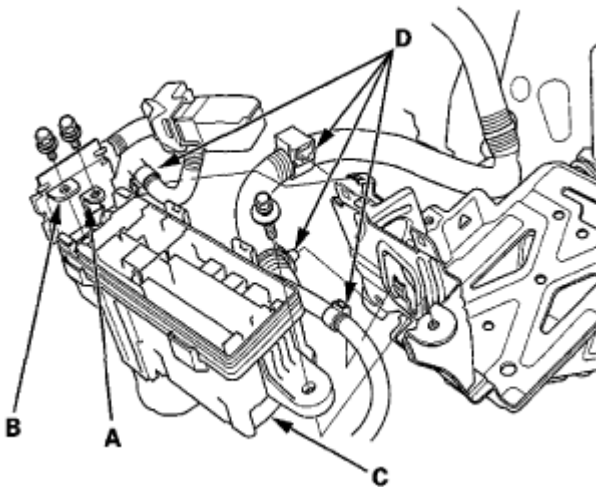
Identifying Engine Wire Harness, Starter Cable Of Main Under-Hood Fuse Box And Harness Clamps
